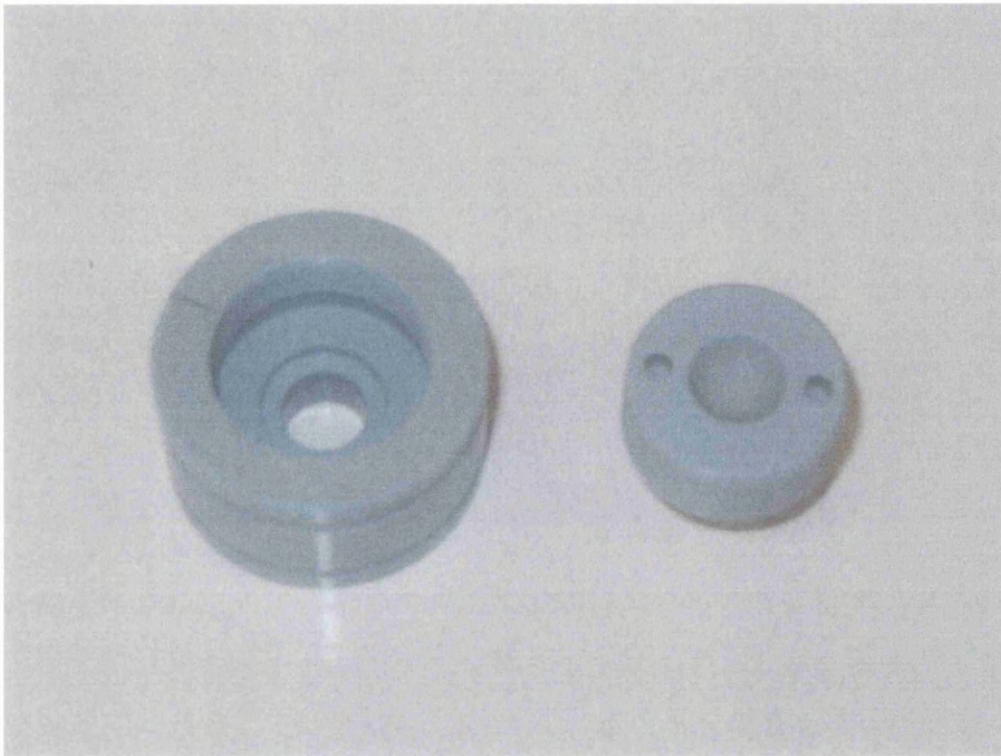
Modified Upper Platen and Plug (Plan View)
